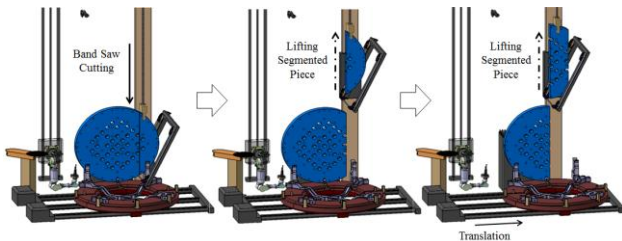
Segmenting for upper support plate of upper internal assembly.
